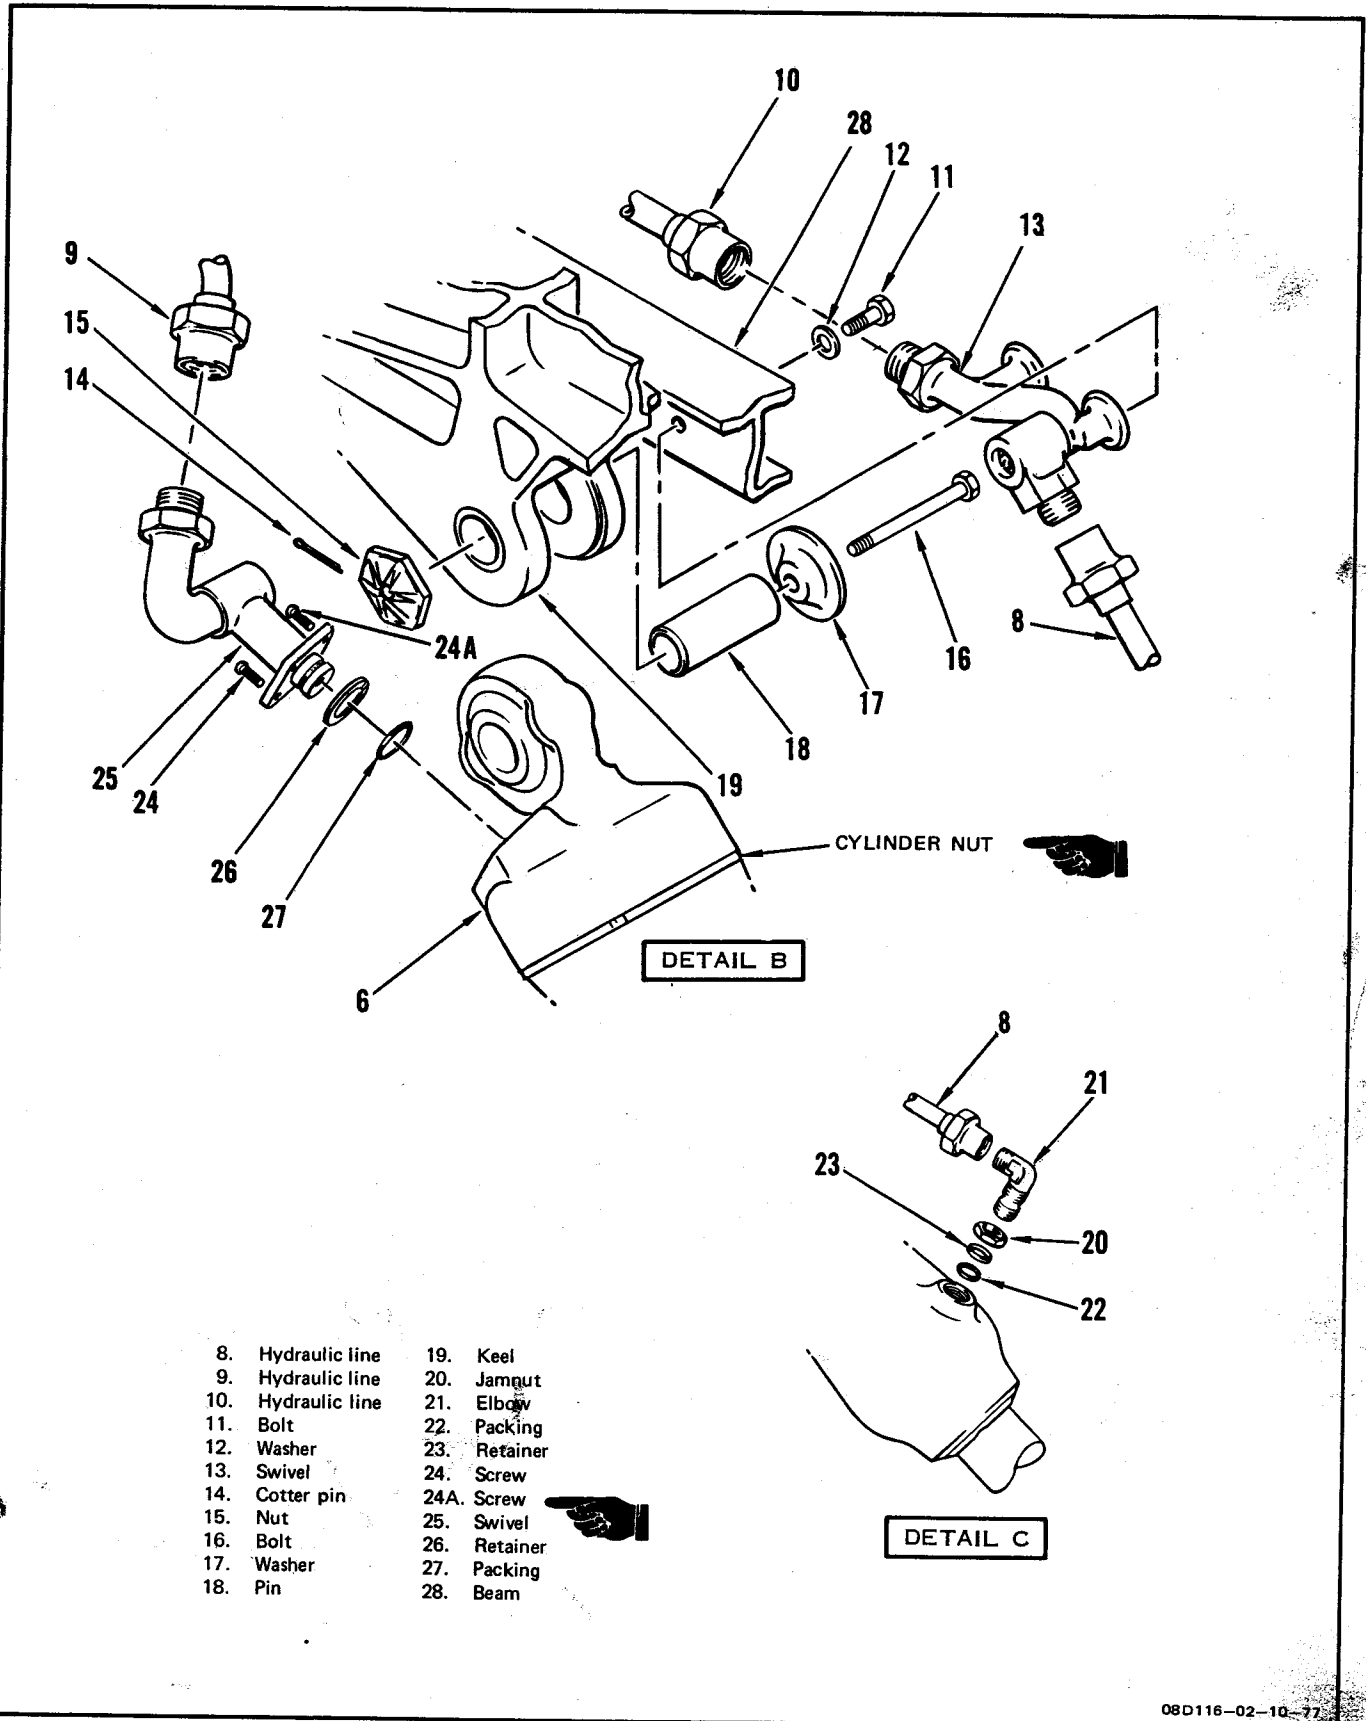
Speed Brake Actuating Cylinder Removal and Installation (Sheet 1)
